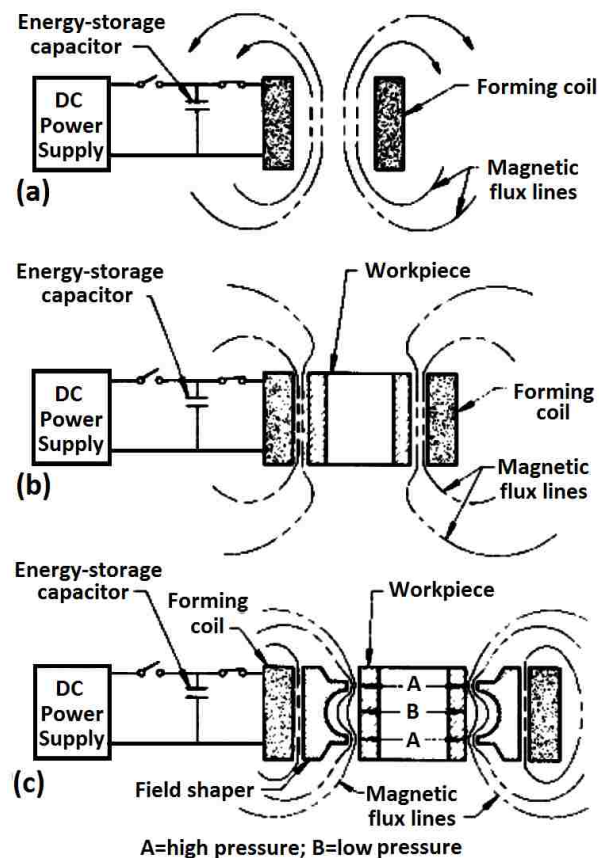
Basic circuit and magnetic field patterns for electromagnetic compression forming of a tubular workpiece, (a) field pattern in absence of workpiece, (b) field pattern with workpiece in forming coil, and (c) field pattern when field shaper is used. A, high pressure; B, low pressure.[135]
